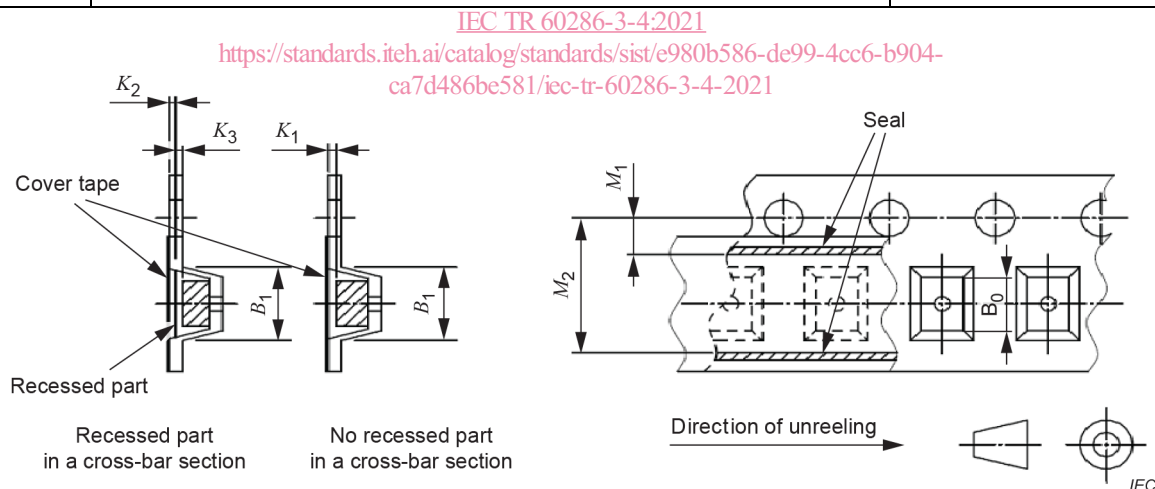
Specified dimensions for emboss taping for Auto Loading Feeder
